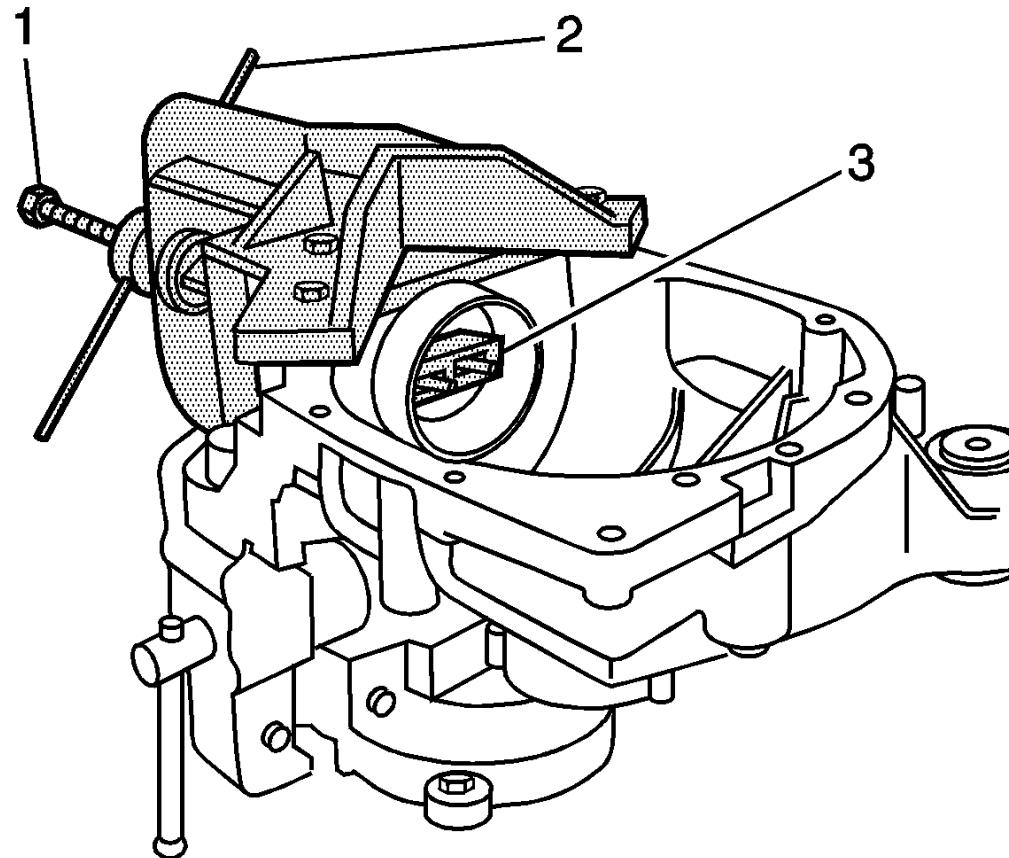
Pressing Inner Bearing Cup Out From Differential Carrier Case
